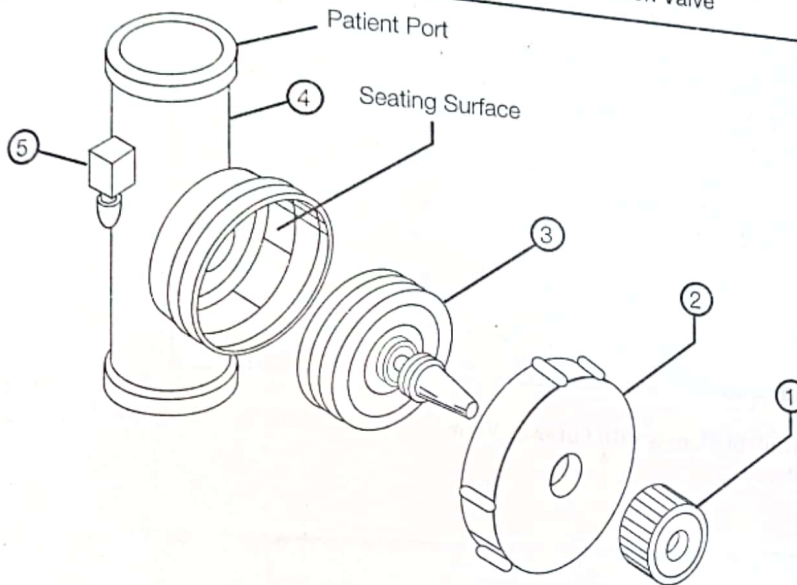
Line Drawing of Exhalation Valve (Exploded View with Key)
